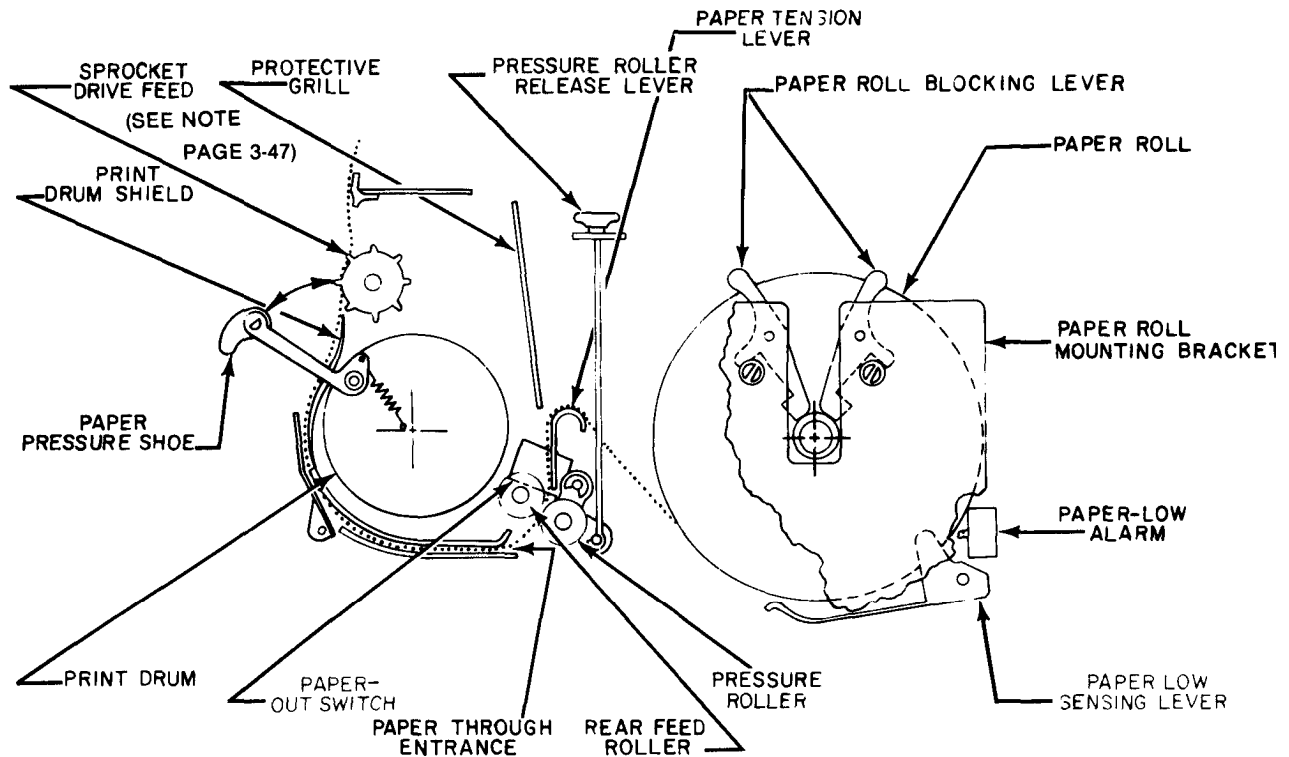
MECHANICAL ASSEMBLIES FOR REMOVABLE PRINTER ASSEMBLY.
